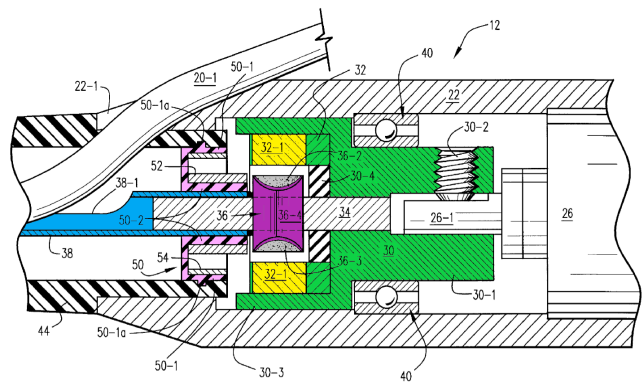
A schematic cross-section of the magnetic coupling mechanism. Relevant components: 20-1 = vacuum/aspiration line, 26 = motor, 26-1 = drive shaft, 30 = connector between magnet ring and drive shaft, 30-4 = vibration damper, 32 = magnet ring, containing 2 magnet pairs, 32-1 = magnet pair 1, 34 = stabilizing shaft, 36-2 = north pole of tubular magnet, 36-3 = south pole of tubular magnet, 36-4 = housing of tubular magnet, 38 = cutter, 40 = ball bearing, 50 = resilient coupling. Adapted from: [89].
